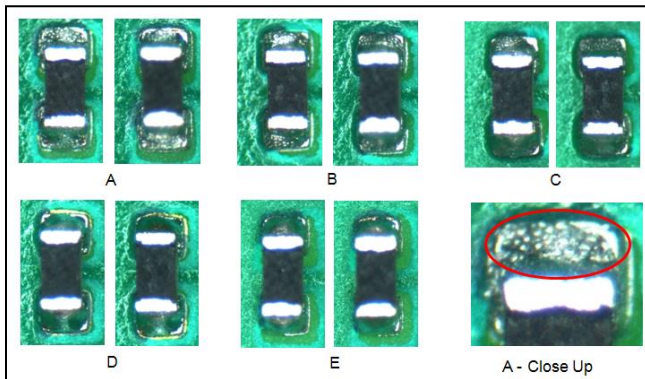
0201 Joints – A, B, C Mottled Solder Appearance
